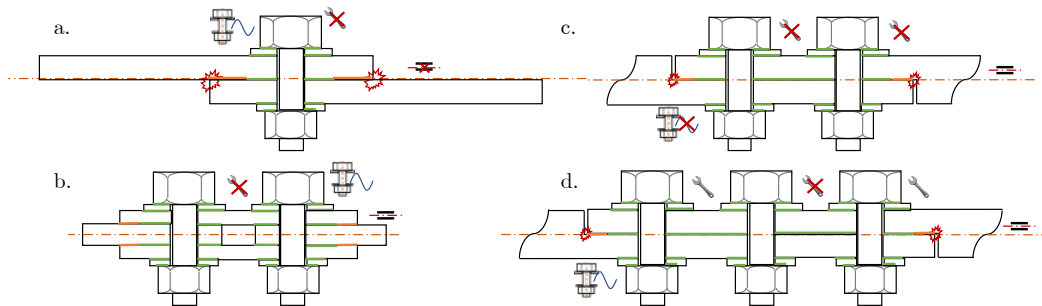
Schemes of several bolted joints. (a) Single bolted joint [7, 8]; (b) Full symmetric double bolted joint [9]; (c) Double bolted joints [10, 11];(d) Brake-Reuß beam (BRB), three bolted connections [12]. Details about the pictograms are available in Appendix A.
